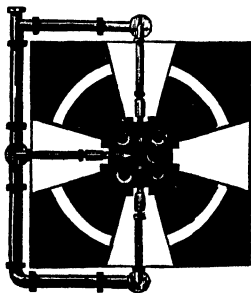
Ground-plan, showing the disposition of the tuyere pipes.
